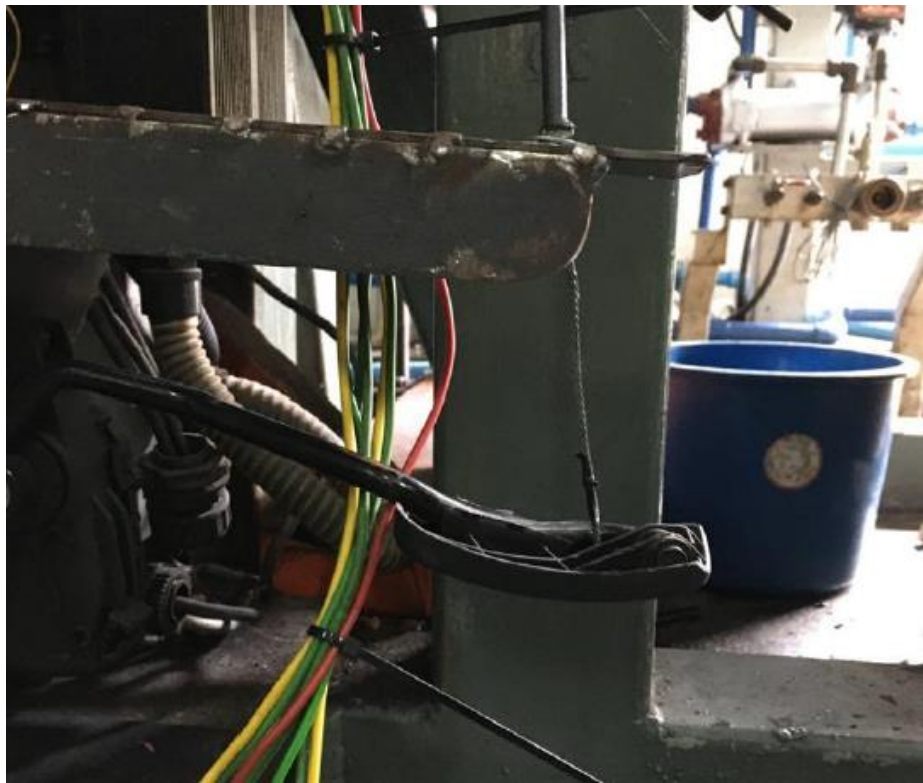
Accelerator Pedal Pulled with Throttle Cable
